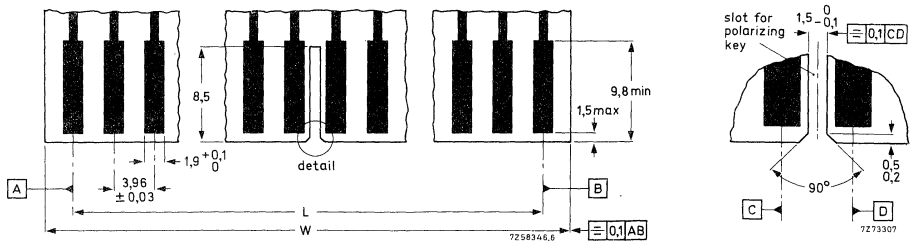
Recommended dimensions of the printed-wiring board; see Table 4 for dimensions L and W.
